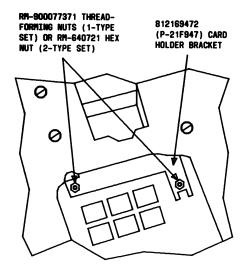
Card Holder Bracket Installed (TOUCH-TONE Set)
